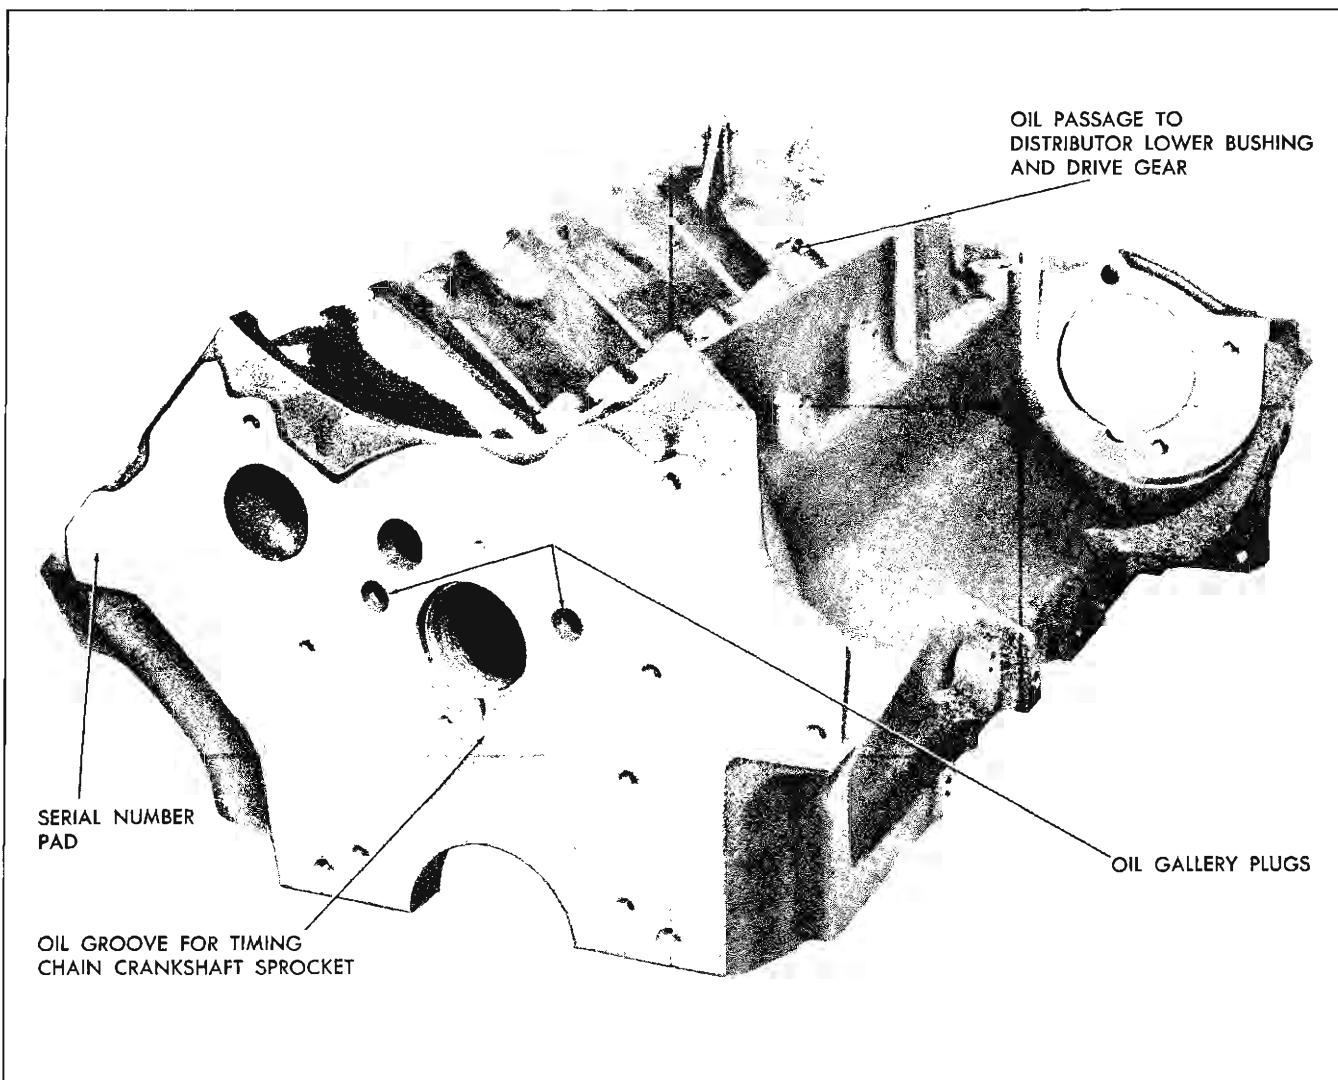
Cylinder Block—View from Left Front—4 Cylinder Engine
